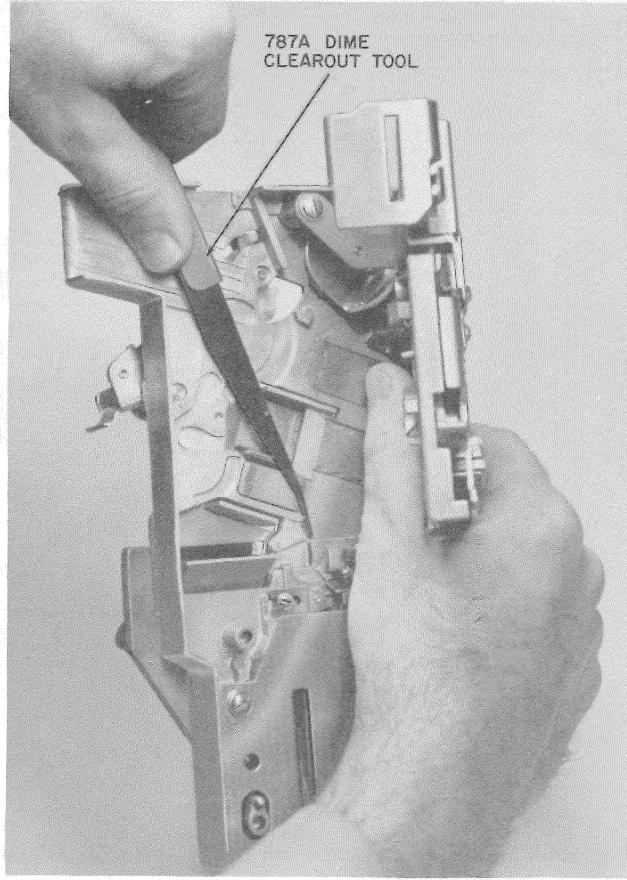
Using a 787A Dime Clearout Tool in Chute
